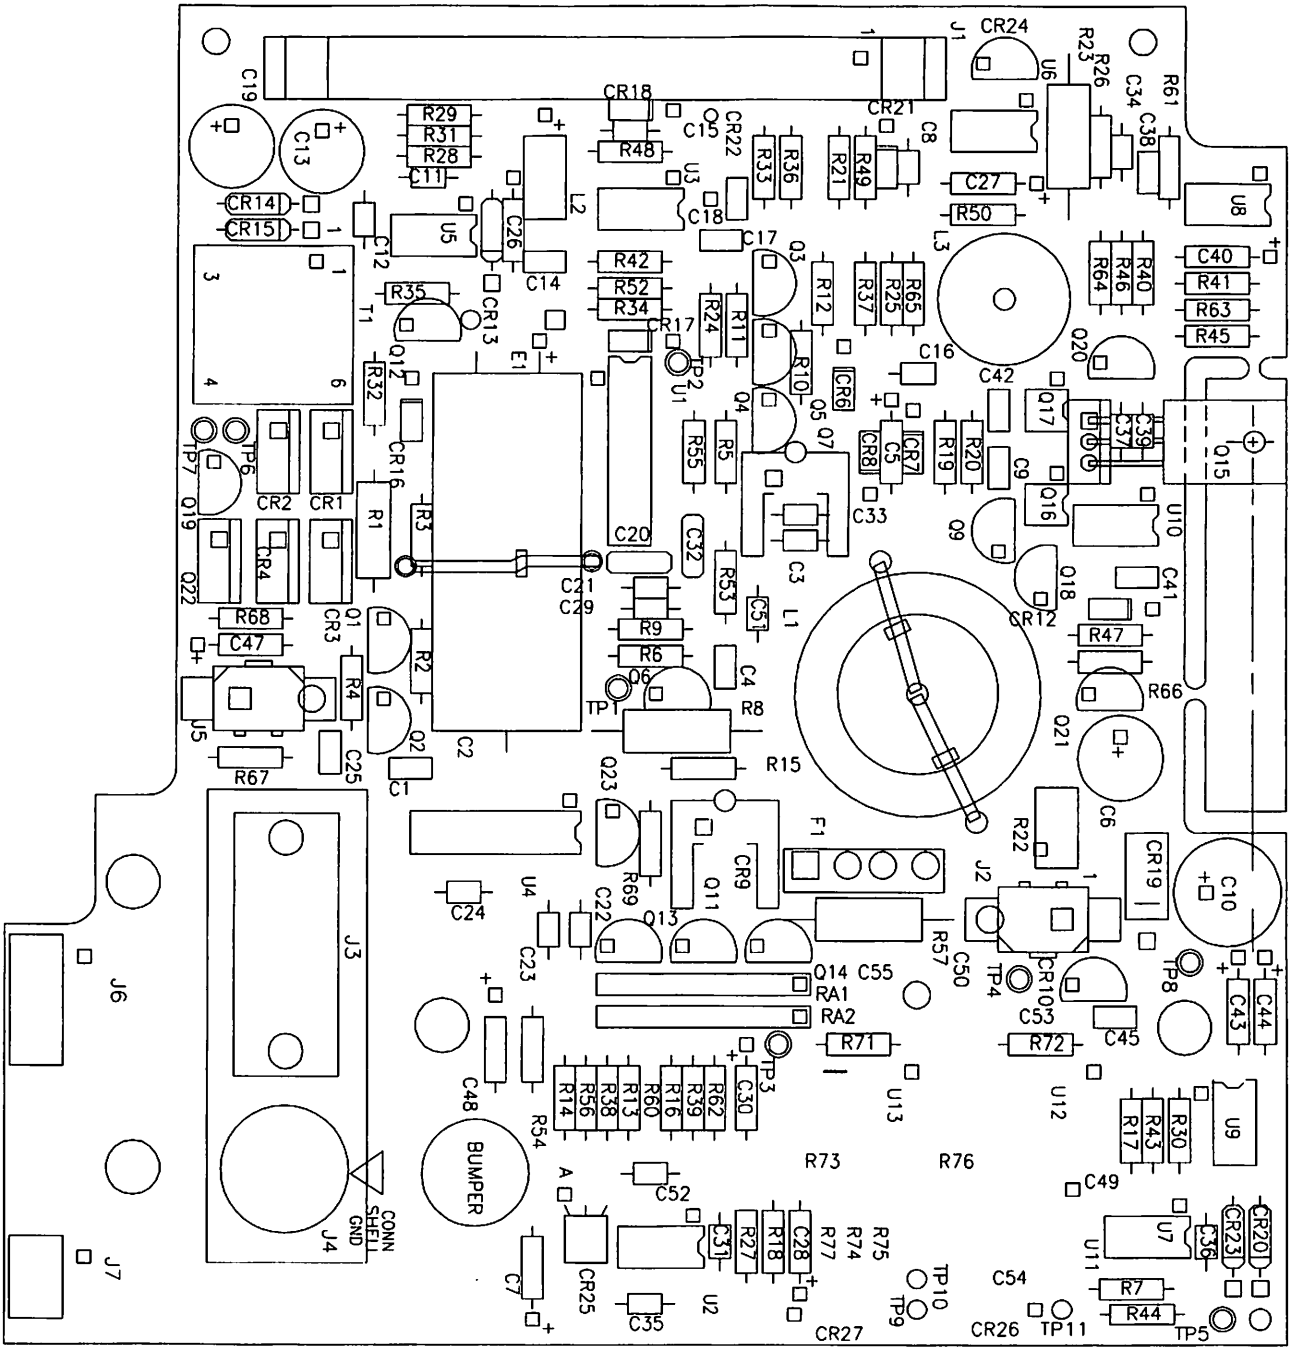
Parts Identification Power Supply CCA [v8.13]
